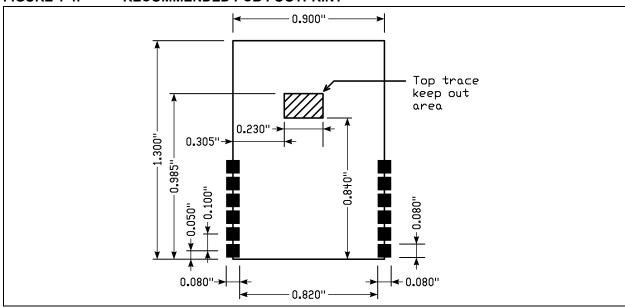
RECOMMENDED PCB FOOTPRINT
